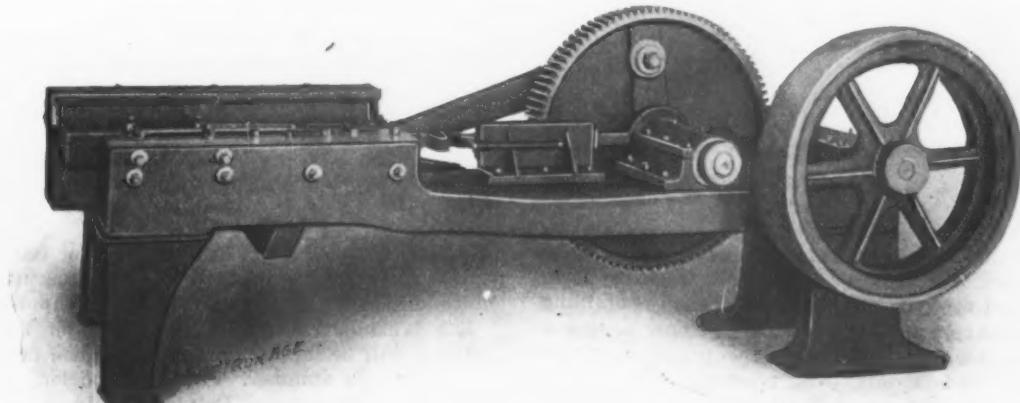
Machine for Rolling Threads up to 1 Inch Diameter by 3 Inches Long.
